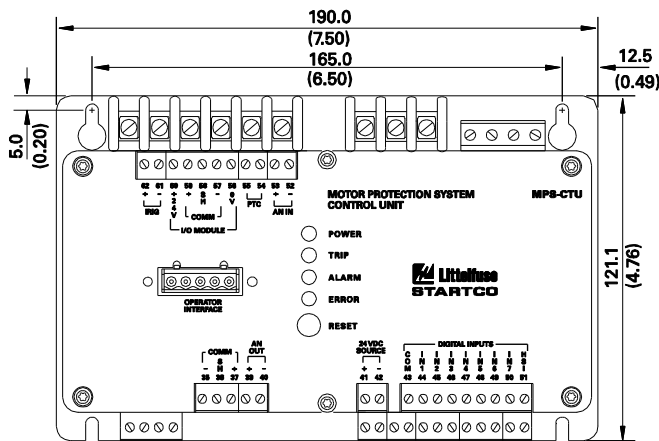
MPS-CTU-XX-X1 Ring Terminal Outline and Mounting Details.
